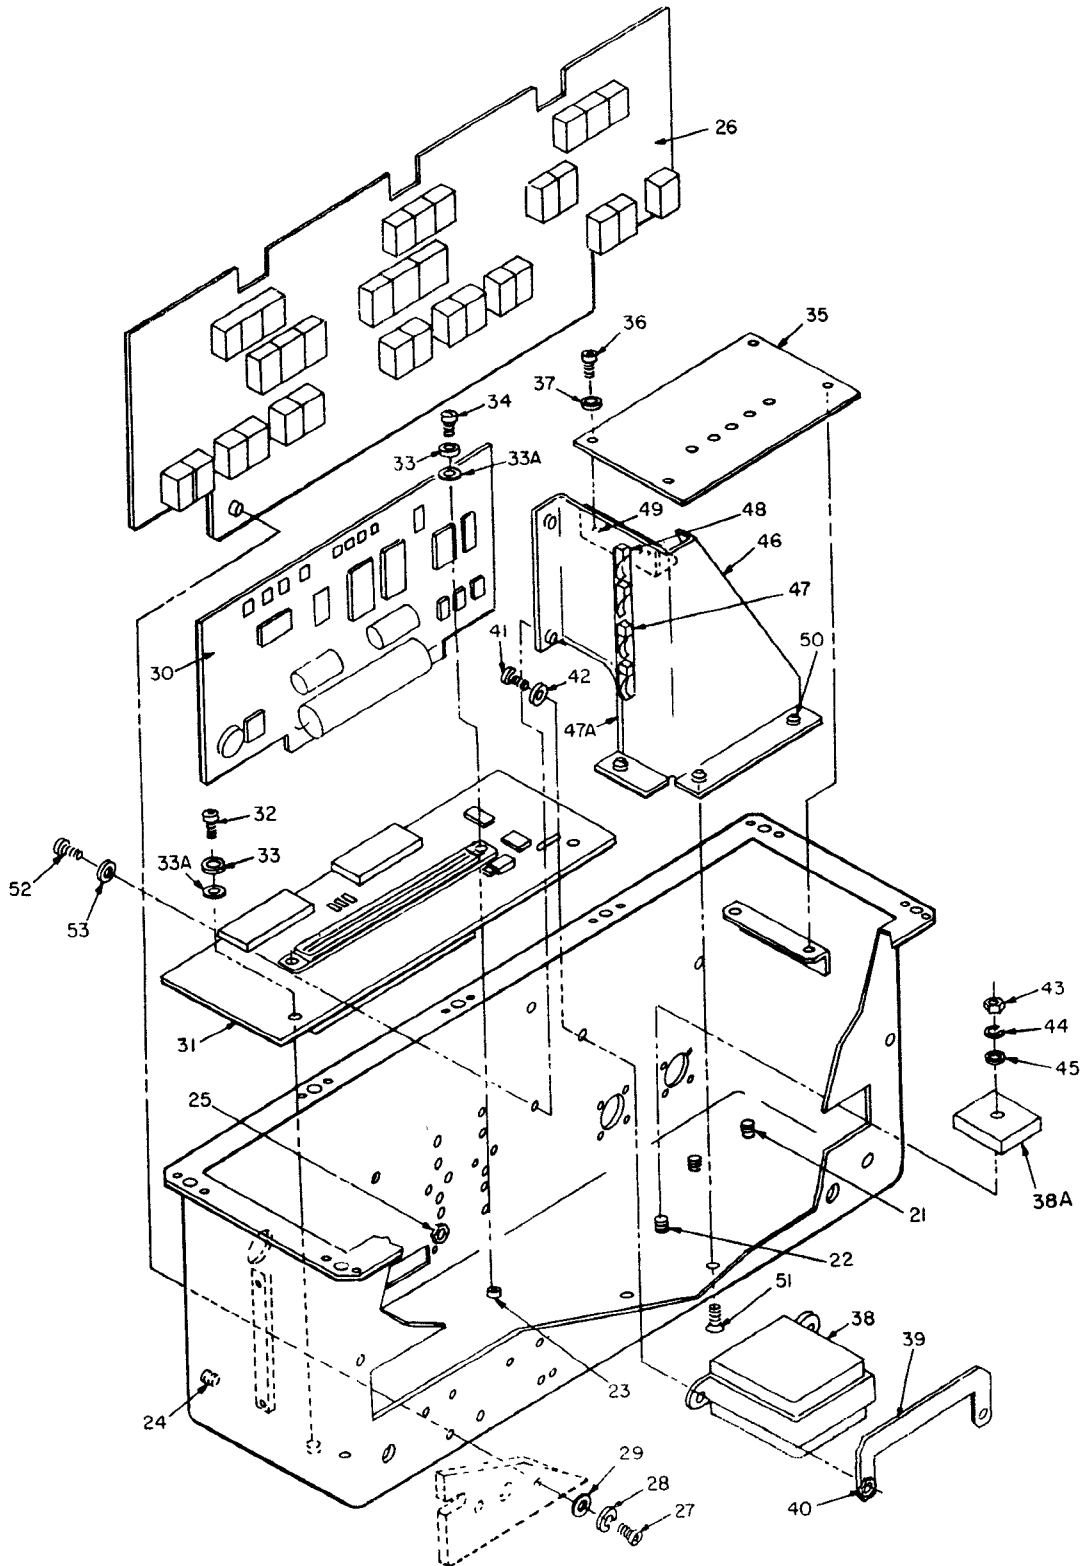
Recorder Assembly (Sheet 2 of 3)
